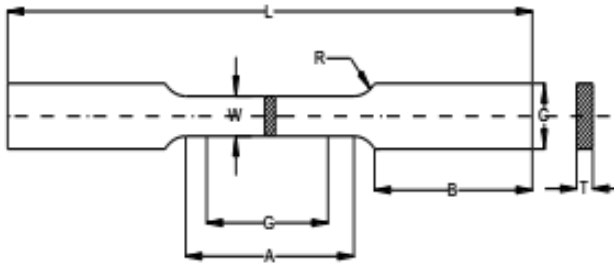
Shape and Dimension of ASTM E8 for tensile testing
